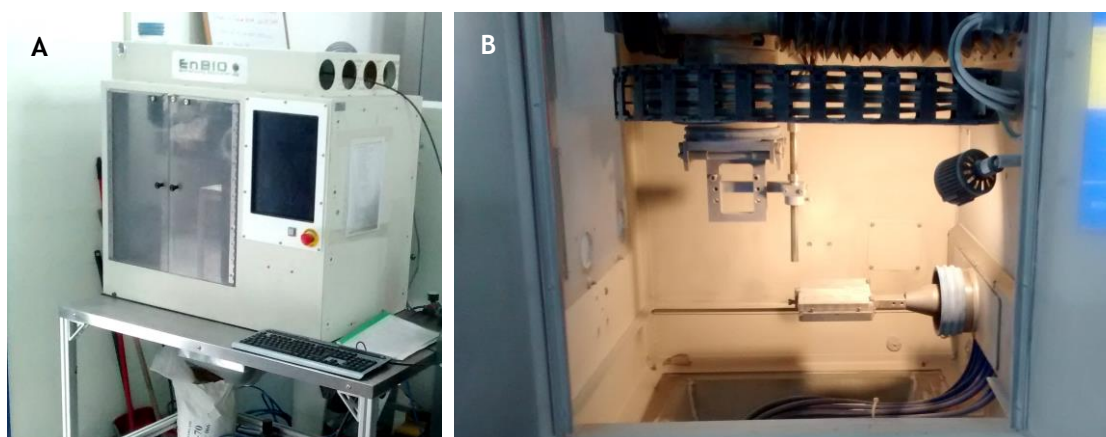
Comco LA3250 Advanced Lathe exterior frame (A) and inside chamber (B) furnished with a single nozzle configuration.
